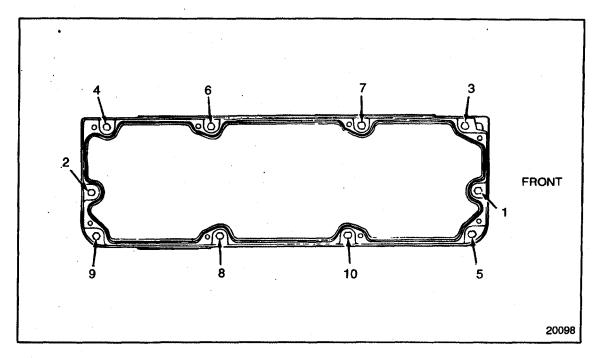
Rocker Cover Base Bolt Tightening Sequence
